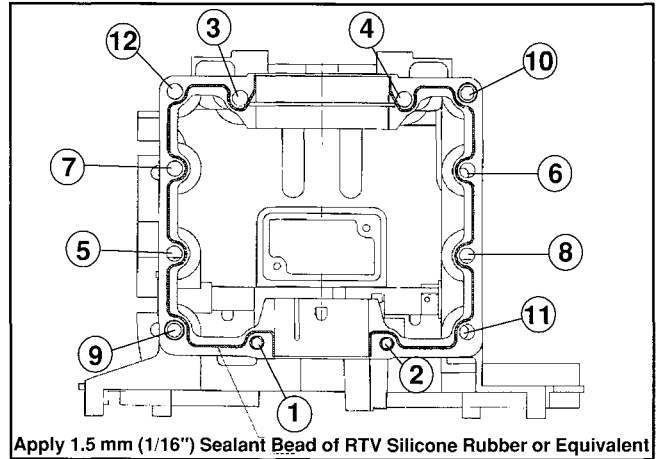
Crankcase Sealant Pattern and Fastener Torque Sequence.
